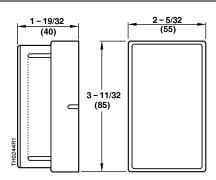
TH 192 HC Dimensions in Inches (Millimeters).
